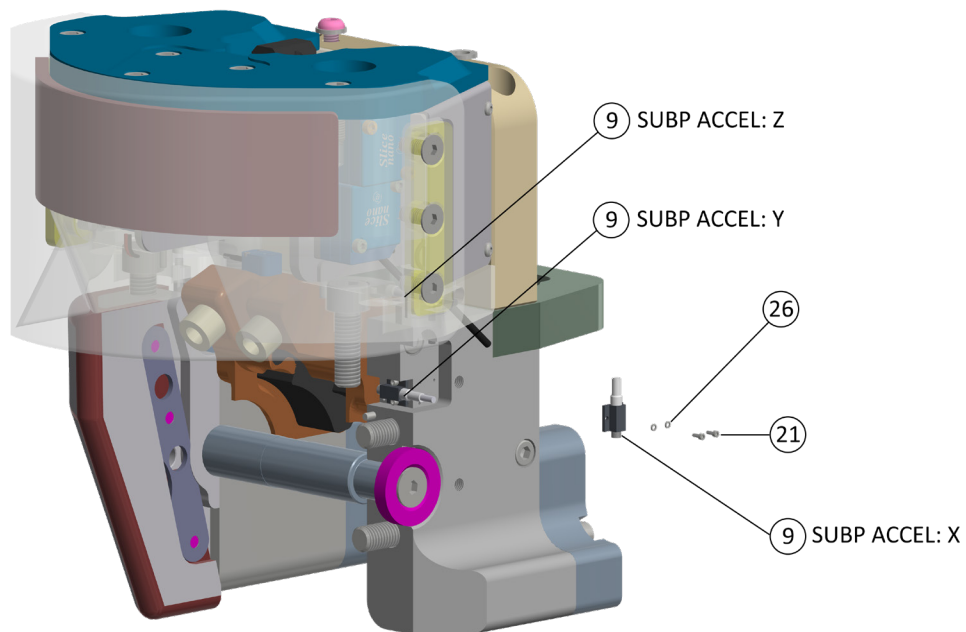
Accelerometers SUBP Top Level Exploded View 3
